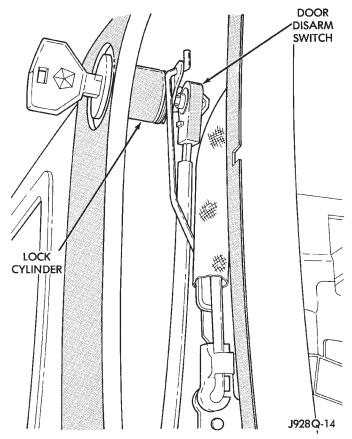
Door Lock Cylinder Switch Remove/Install - Typical
